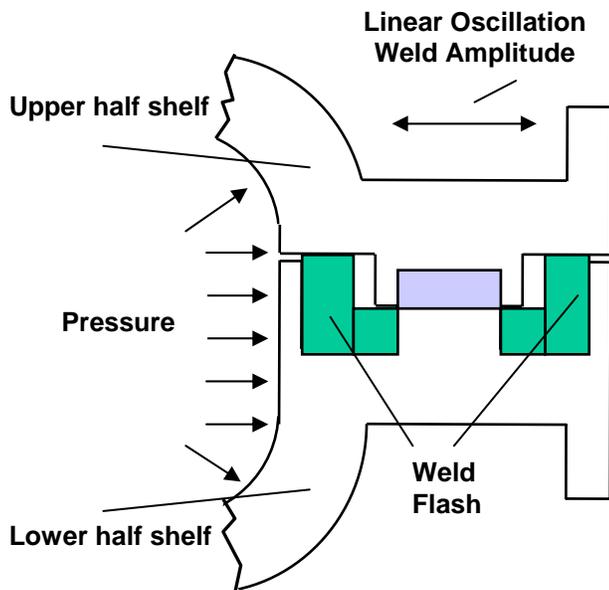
Butt-joint design principles for automotive linear vibration welded hollow components [1, 13-14].
